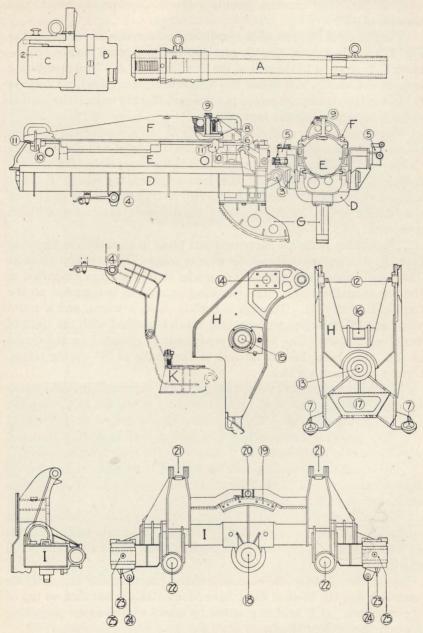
75-mm. Howitzer, M1, and 75-mm. Howitzer Carriage, M3A1.
